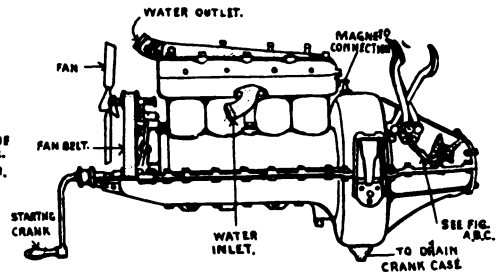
Left side. Showing cooling water inlet and outlet. Note cylinders are "en-bloc," a typical unit power plant.
